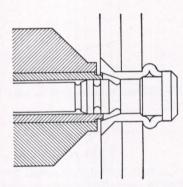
Driver inside nose of gun breaks off outer collar from sleeve and forces it into locking groove.
